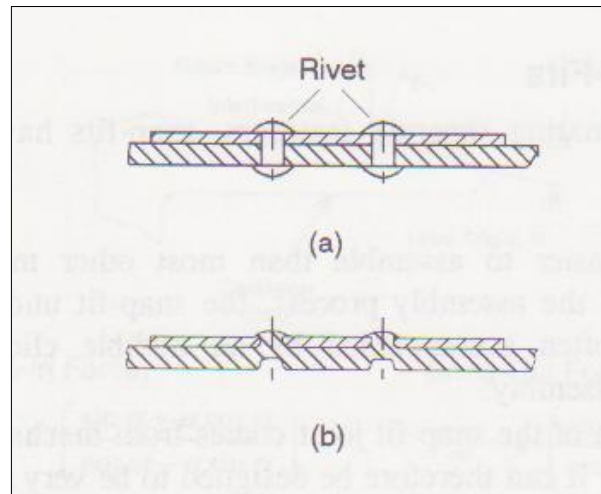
Four-piece riveted assembly redesigned as a two-piece assembly by integrating the fastening function into higher level parts. (a) Original riveted design. (b) Redesign using formed features.
